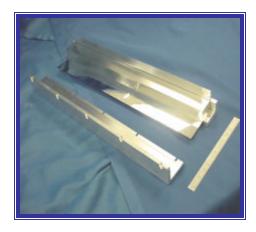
Wrapping Mold Fixture with Al "Crystal" & Reflective Film in Place
